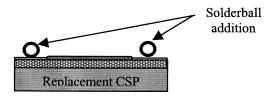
Ball Attachment to Replacement CSP Prior to PCB Mounting
